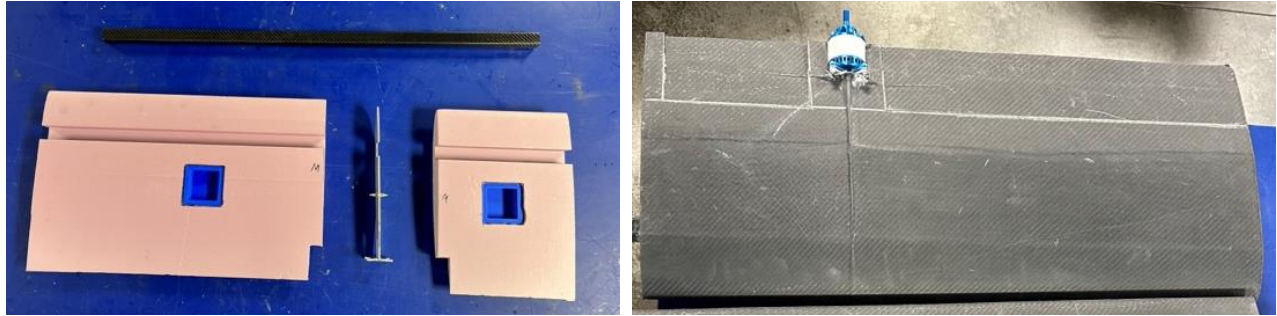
Wing Manufacturing Process (From Left: Foam Cores, Spar, and Motor Mount before Layup, Completed Wing)
